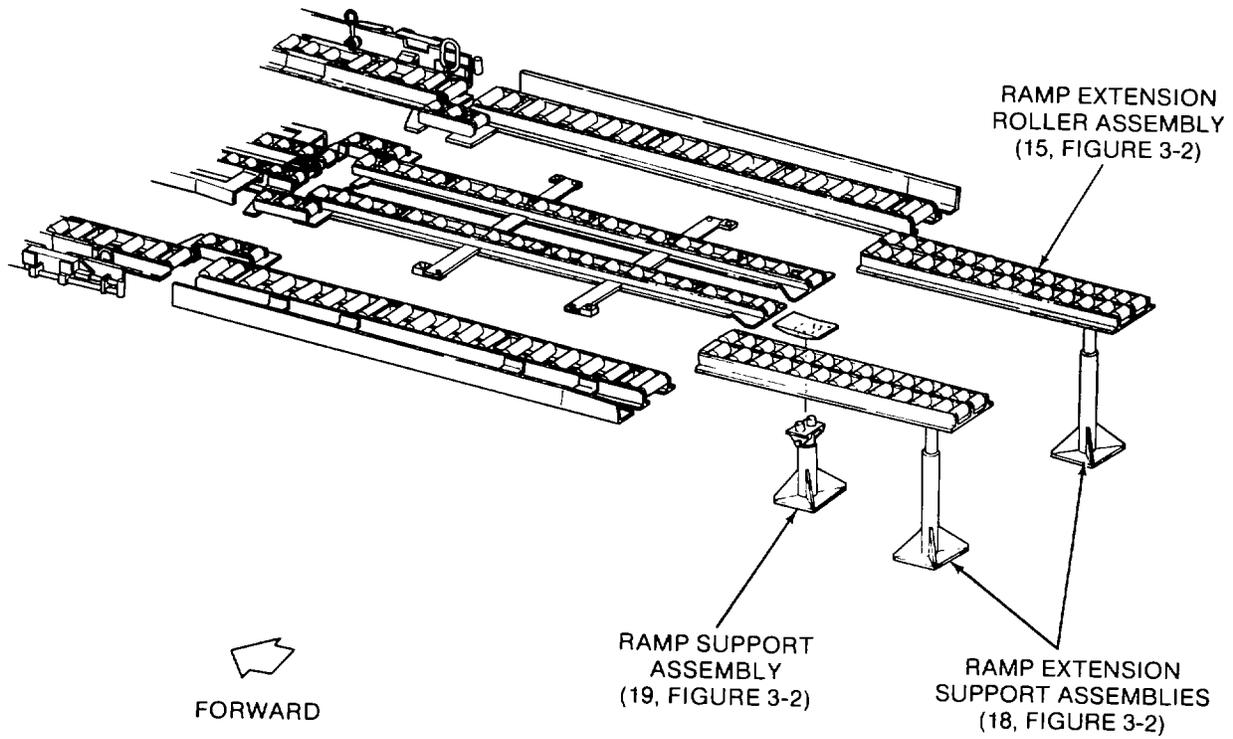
Ramp Extension and Ramp Extension Support Assemblies Installed
